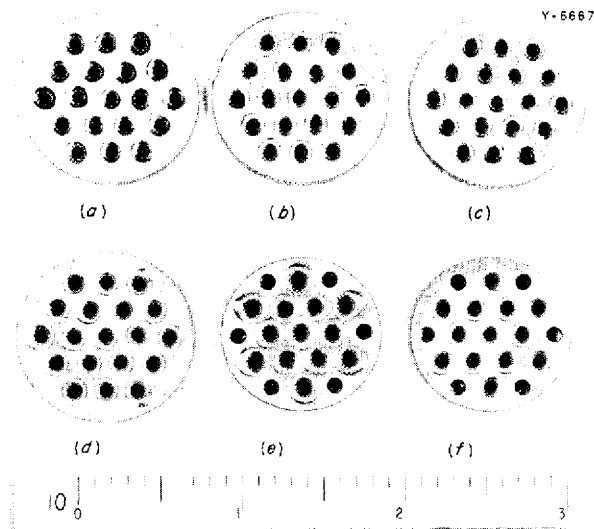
Typical Cone-Arc Welds. For description of the welding conditions for each of these samples see Table 23.
